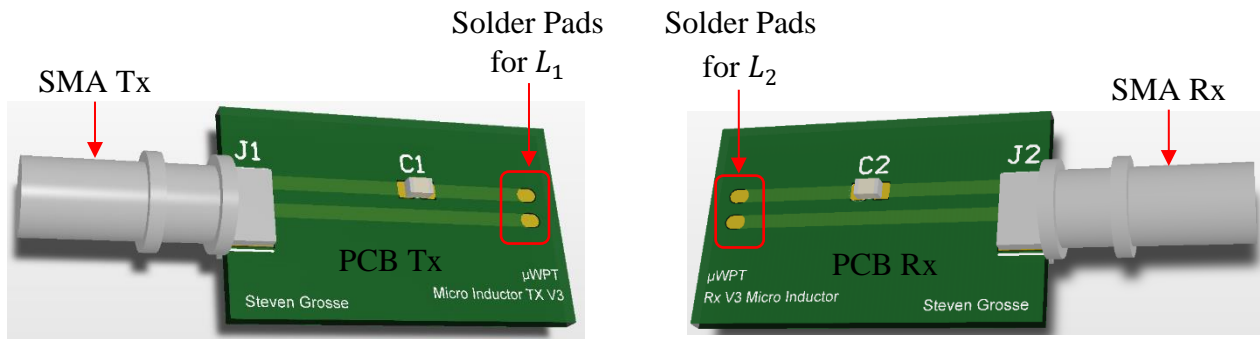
CAD model showing for PCB test specimens for experimental setup
